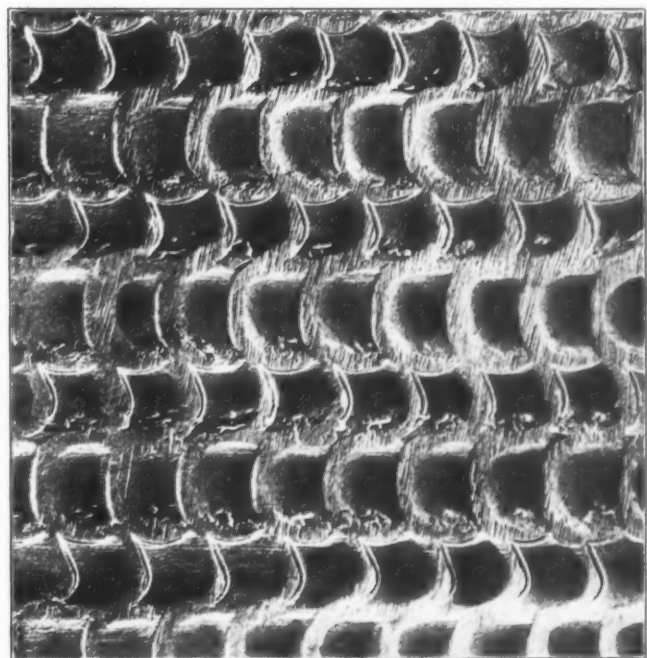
Overlapping Welds Made in Welding Chromium and Nickel Steel Sheets to Croloy Bonded Plate
